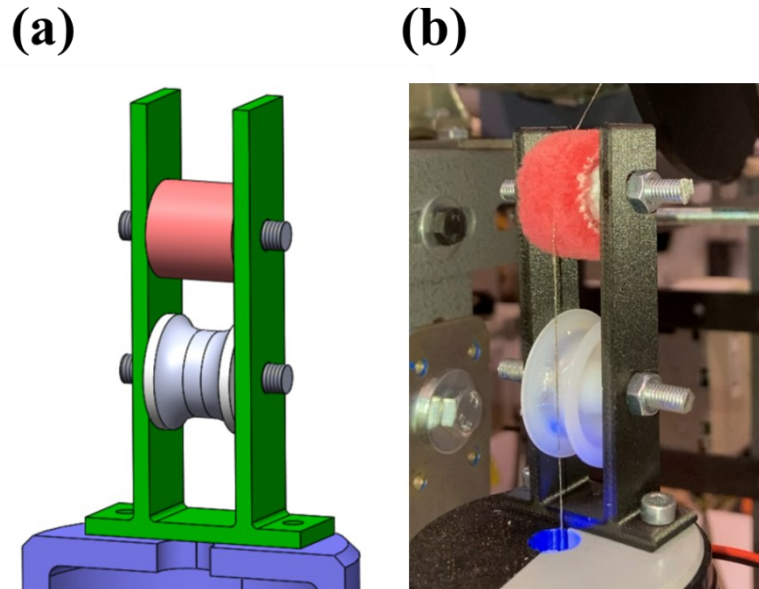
Resin cleaning in a) CAD representation and b) photos of the parts produced
